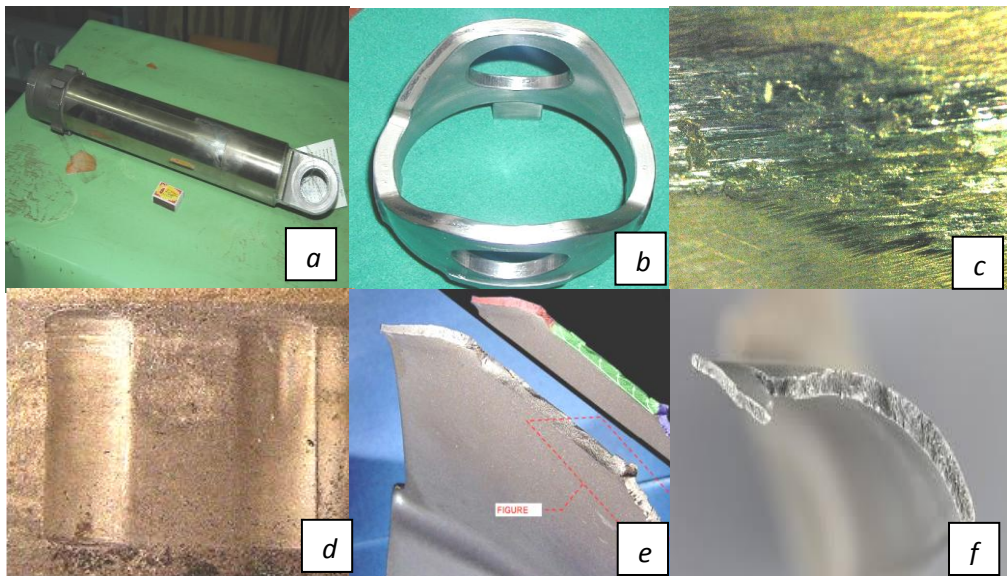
Parts made of titanium alloys damaged by fretting corrosion during operation: a – front landing gear rod of the aircraft made of VT-22 alloy; b – landing gear grip made of VT-22 alloy; c – damage topography of the landing gear lock grip; d – damage to the rail of the flaps retraction mechanism of the An-72 aircraft; e, f – damage to the compressor blade of the CFM-56 gas turbine engine.
